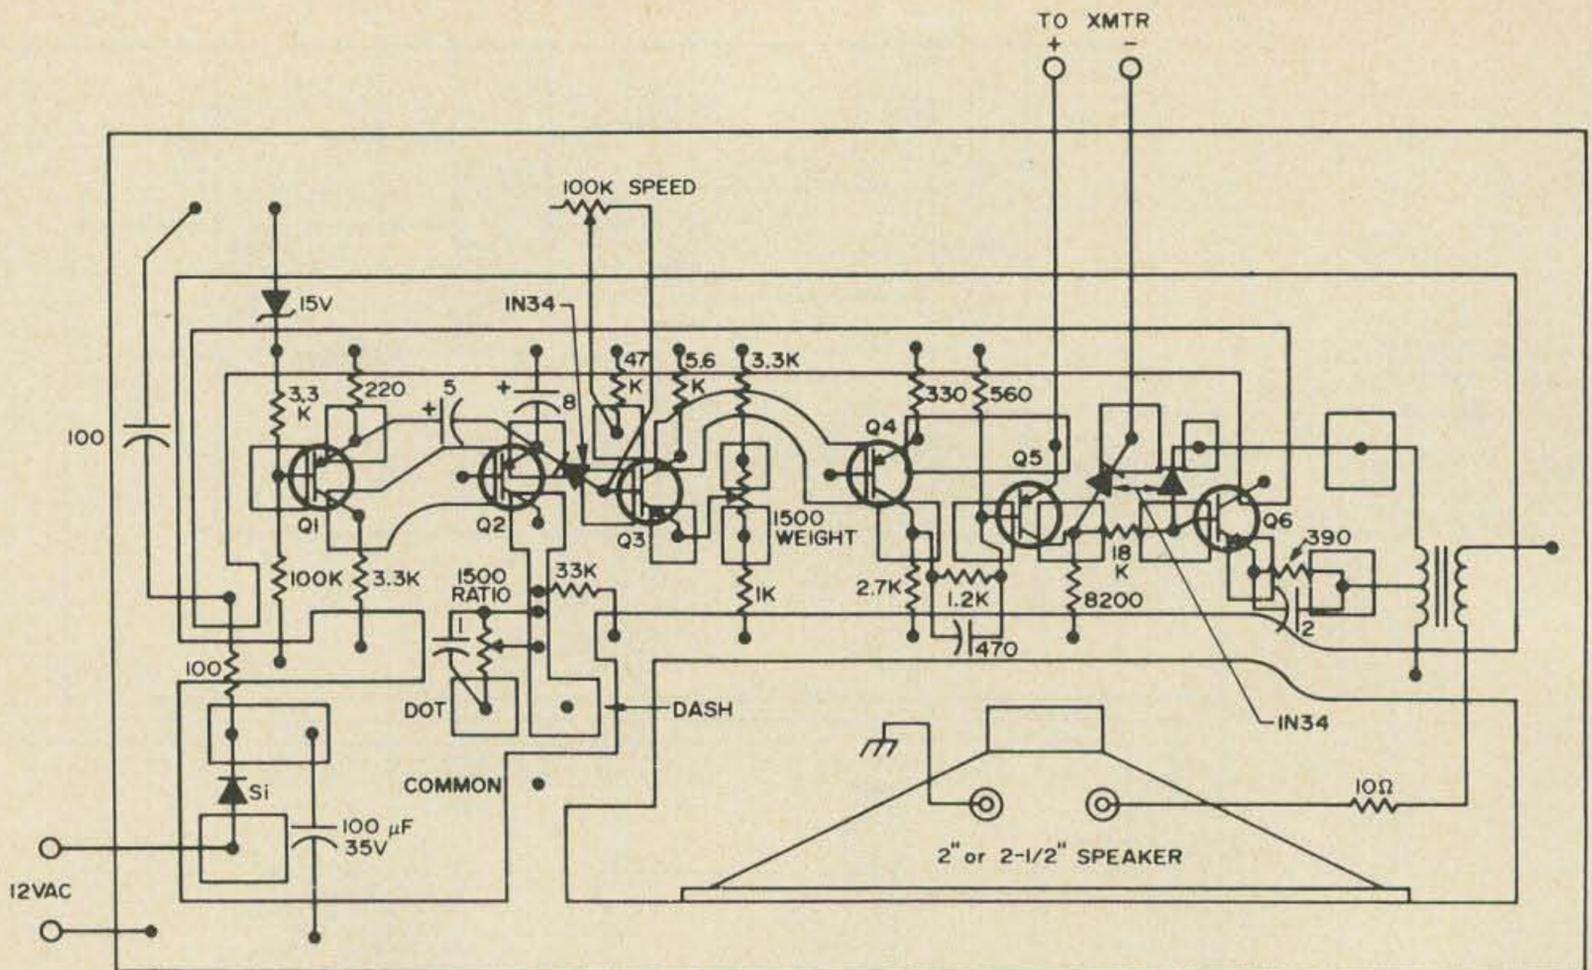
This composite sketch should help in positioning of parts on the etched board.
